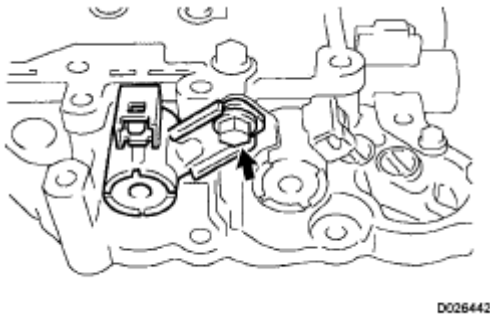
Locating Shift Solenoid Valve S4 Bolt
